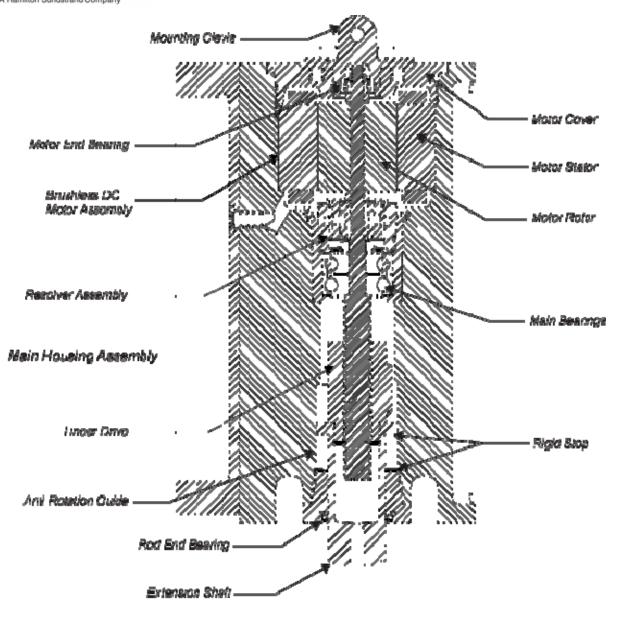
HFG2.0 Cut-Away View – Actuator Main Housing Assembly
